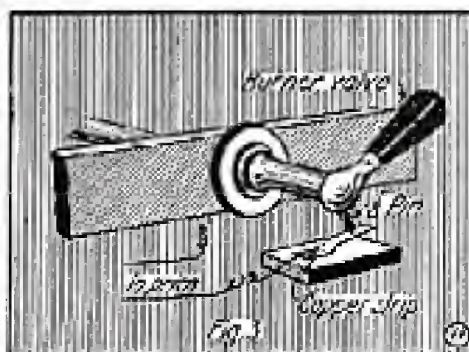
Detail of Automatic Gas Stove Igniter Attachment.
